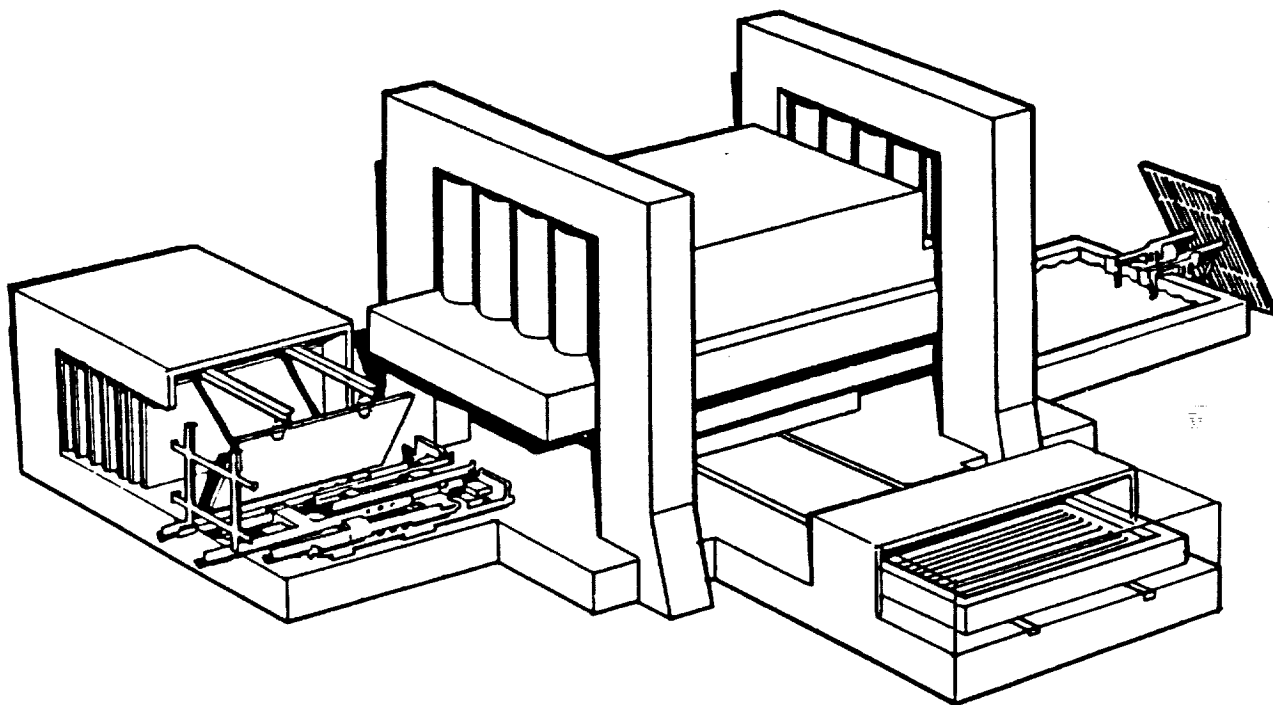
Forming Blank and Loading Part for Thermal Processing.
